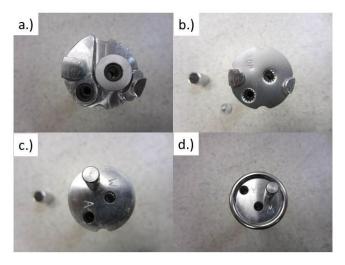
Assembly of the fitting plate at the top of the pump for holding the air and water lines. (a) Bare top of pump. (b) Fitting/grab plate added ("TOP" must face upwards). (c) Top plate added. (d) Collar added to lock parts (a-c) together.
